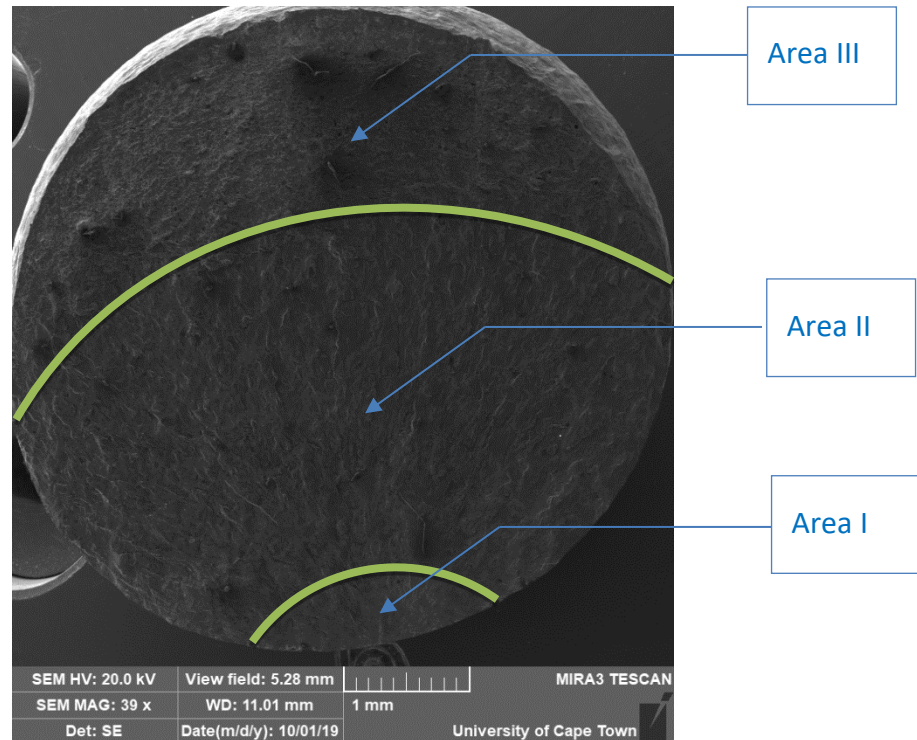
Overview of fractured surface on AISI316L observed using SEM showing three distinct fracture surface areas.
